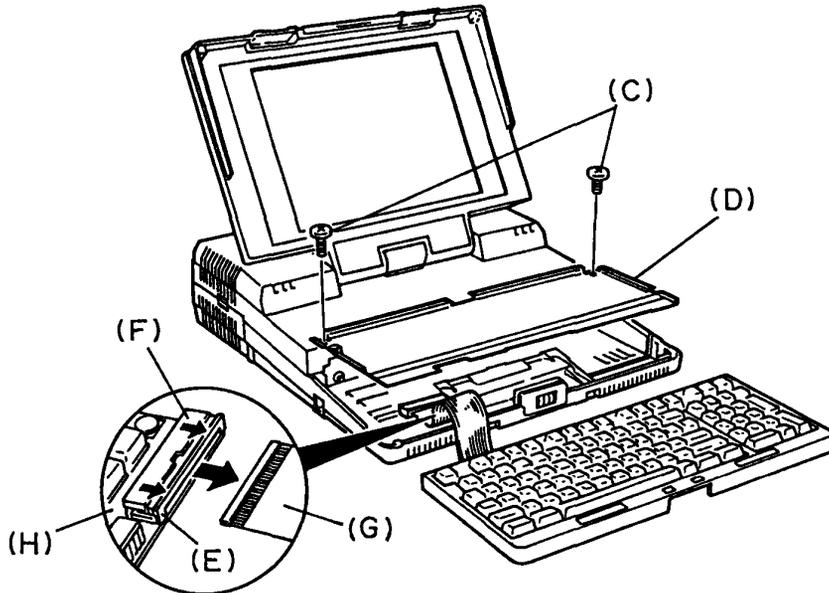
Removing the shield plate and disconnect the keyboard cable
